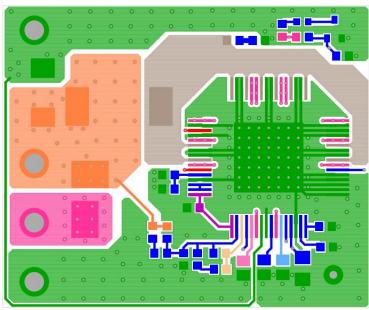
TOP COMPONENT PLACEMENT LAYER
